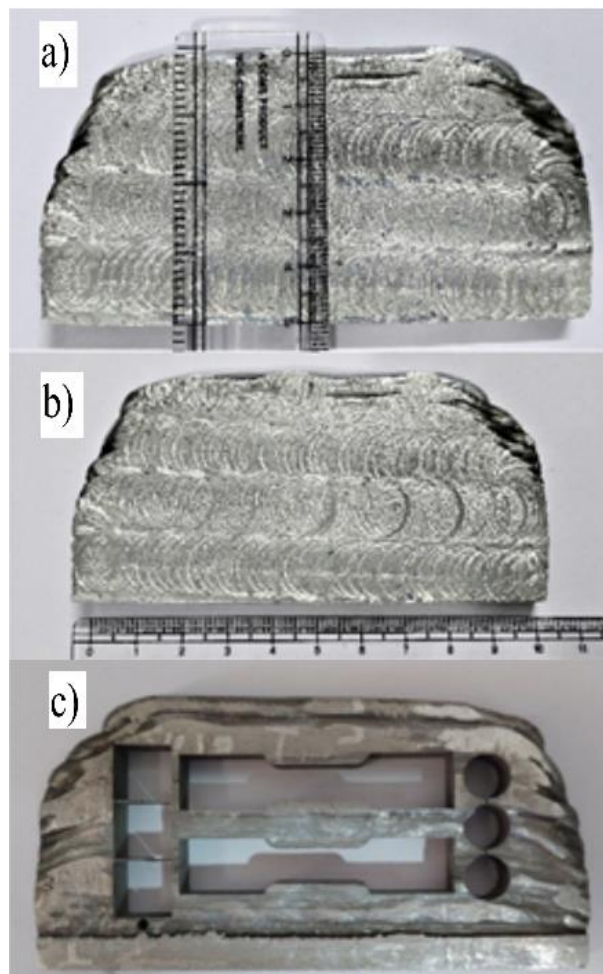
Height (a) and Length (b) of the built wall, Samples cut from wall (c) for various tests
